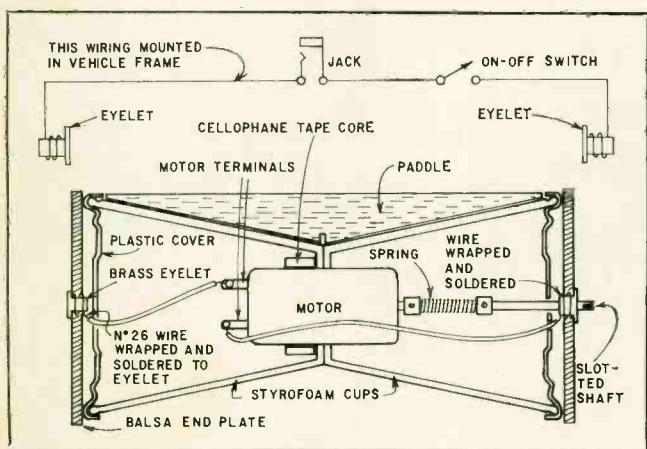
Cement the motor inside the drive roller with some RTV rubber. Cellophane tape core holds motor securely in place.
